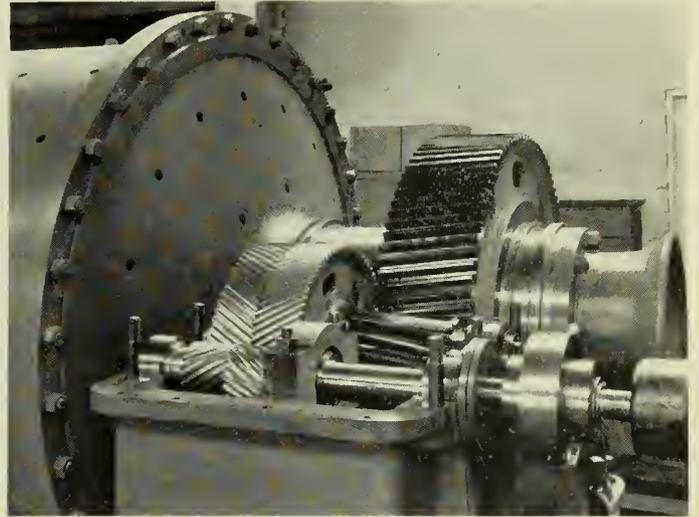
Drive Gears for a 6-foot by 5-foot Ball Mill.
